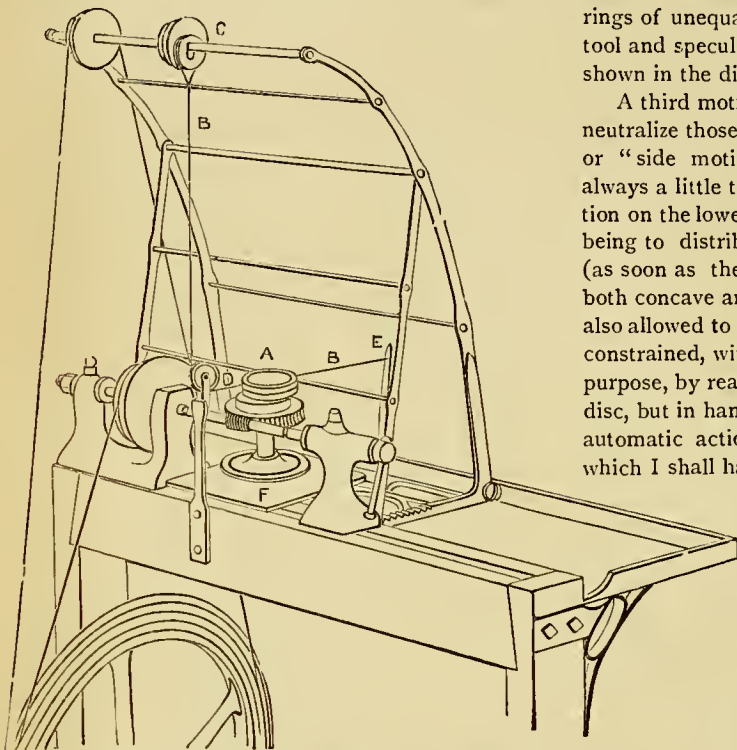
REV. W. HODGSON'S SPECULUM GRINDING MACHINE FOR SMALL SPECULA, ADAPTED TO A LATHE HAVING OVERHEAD MOTION.
